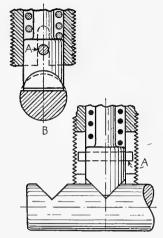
The round plunger is flat milled to a 90-deg, included angle and prevented from turning by pin A engaging milled slots in the threaded plug. In the end view shown at B, it can be seen that, if the spring tension is to be adjusted, at least a half turn must be given so that the flattened point will coincide with the slot in the rod.
